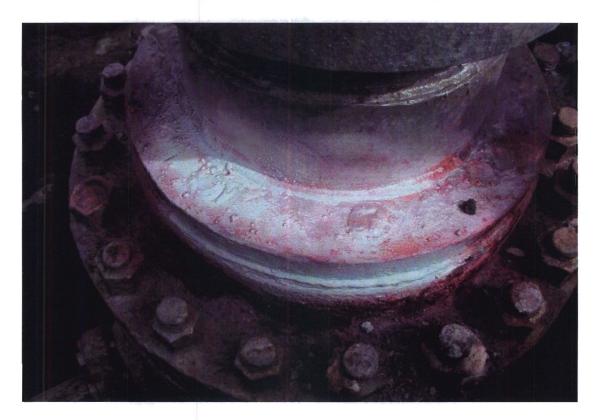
Die penetrant applied to welds on the wellhead of BO-2 where the leak occurred to identify cracks or holes. No welding cracks were detected, but a small pinhole in the weld covering one bolt hole showed up.
